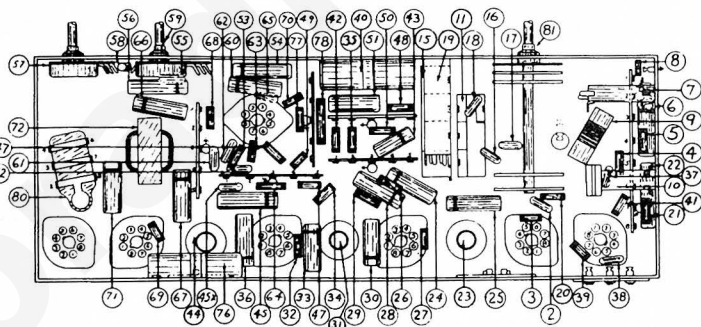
LOCATIONS OF PARTS—UNDER CHASSIS
